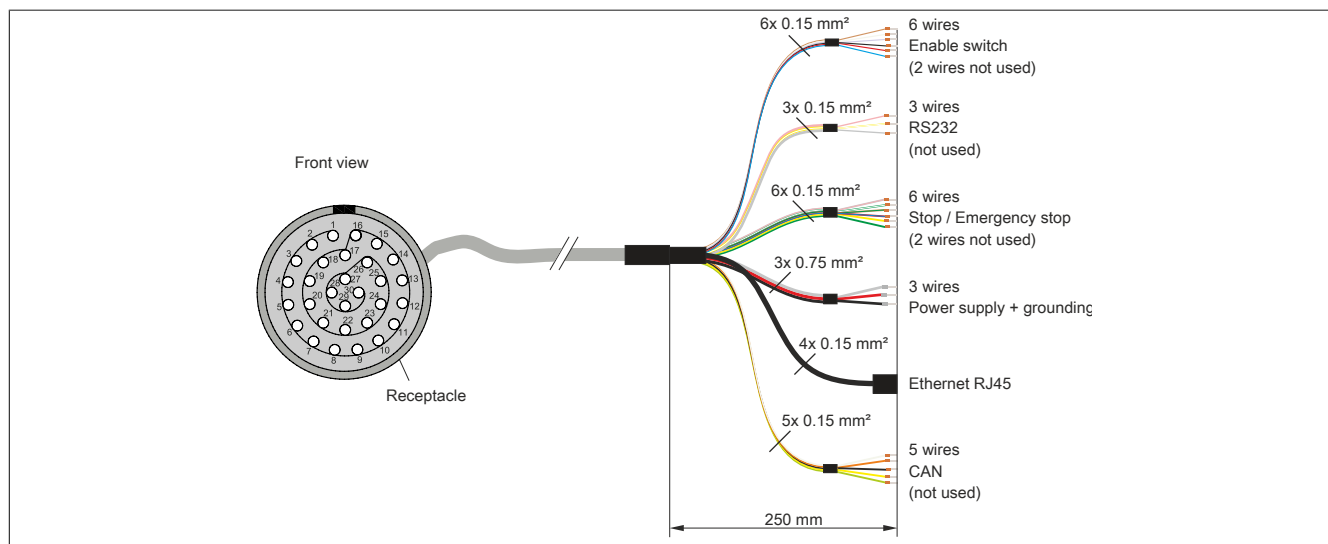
5CAMPC.0020-11 - Control cabinet cable - Pinout
